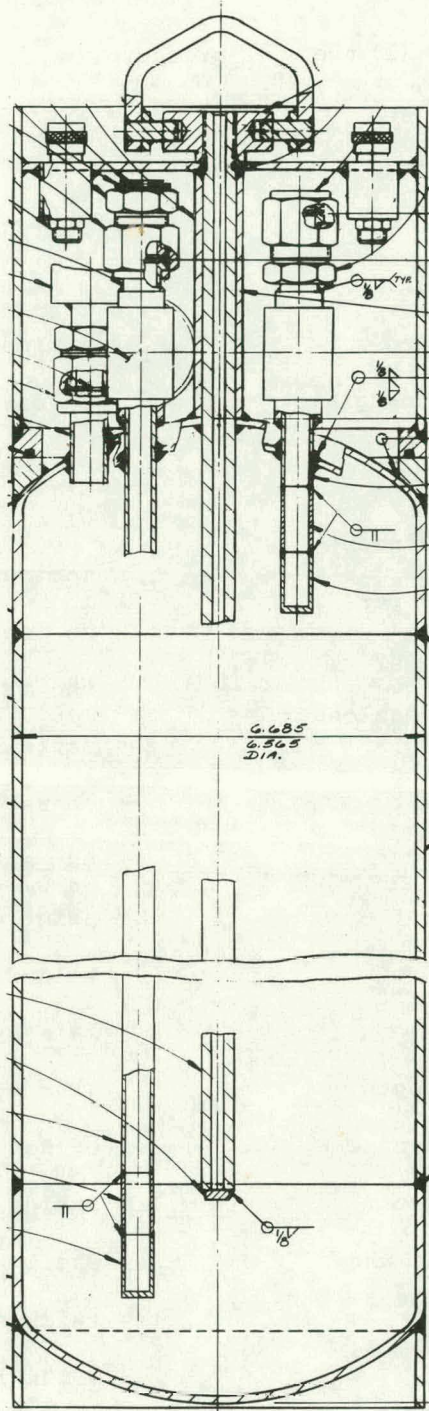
AL-M1 configuration-5 inner container [2].
